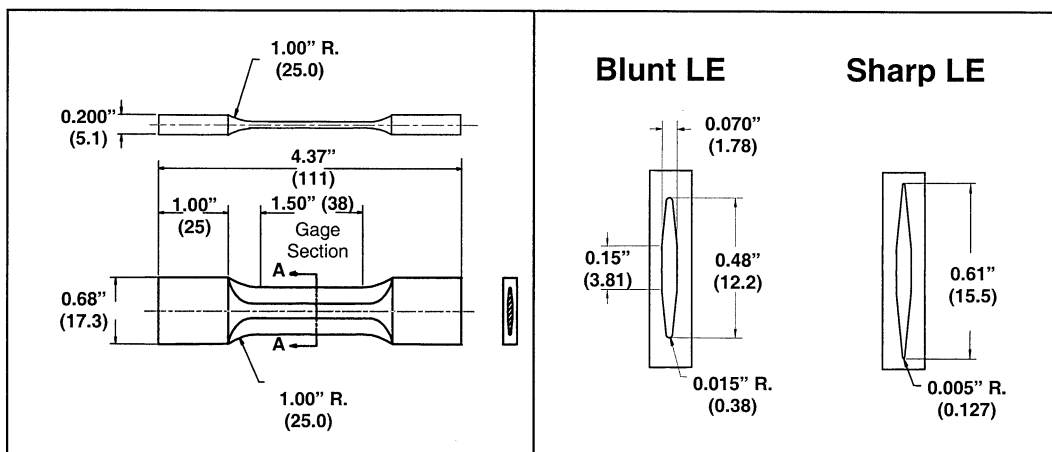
Diamond cross-section test specimen, dimensions in inches (mm).<sup>10</sup>
